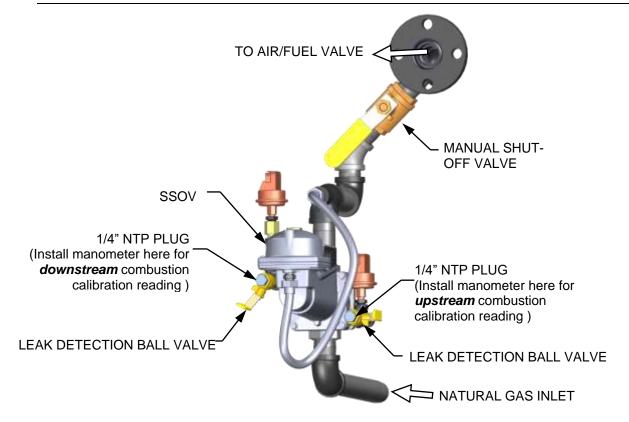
1/4 Inch Gas Plug Location – BMK750 & 1000 (P/N 22322 shown)
